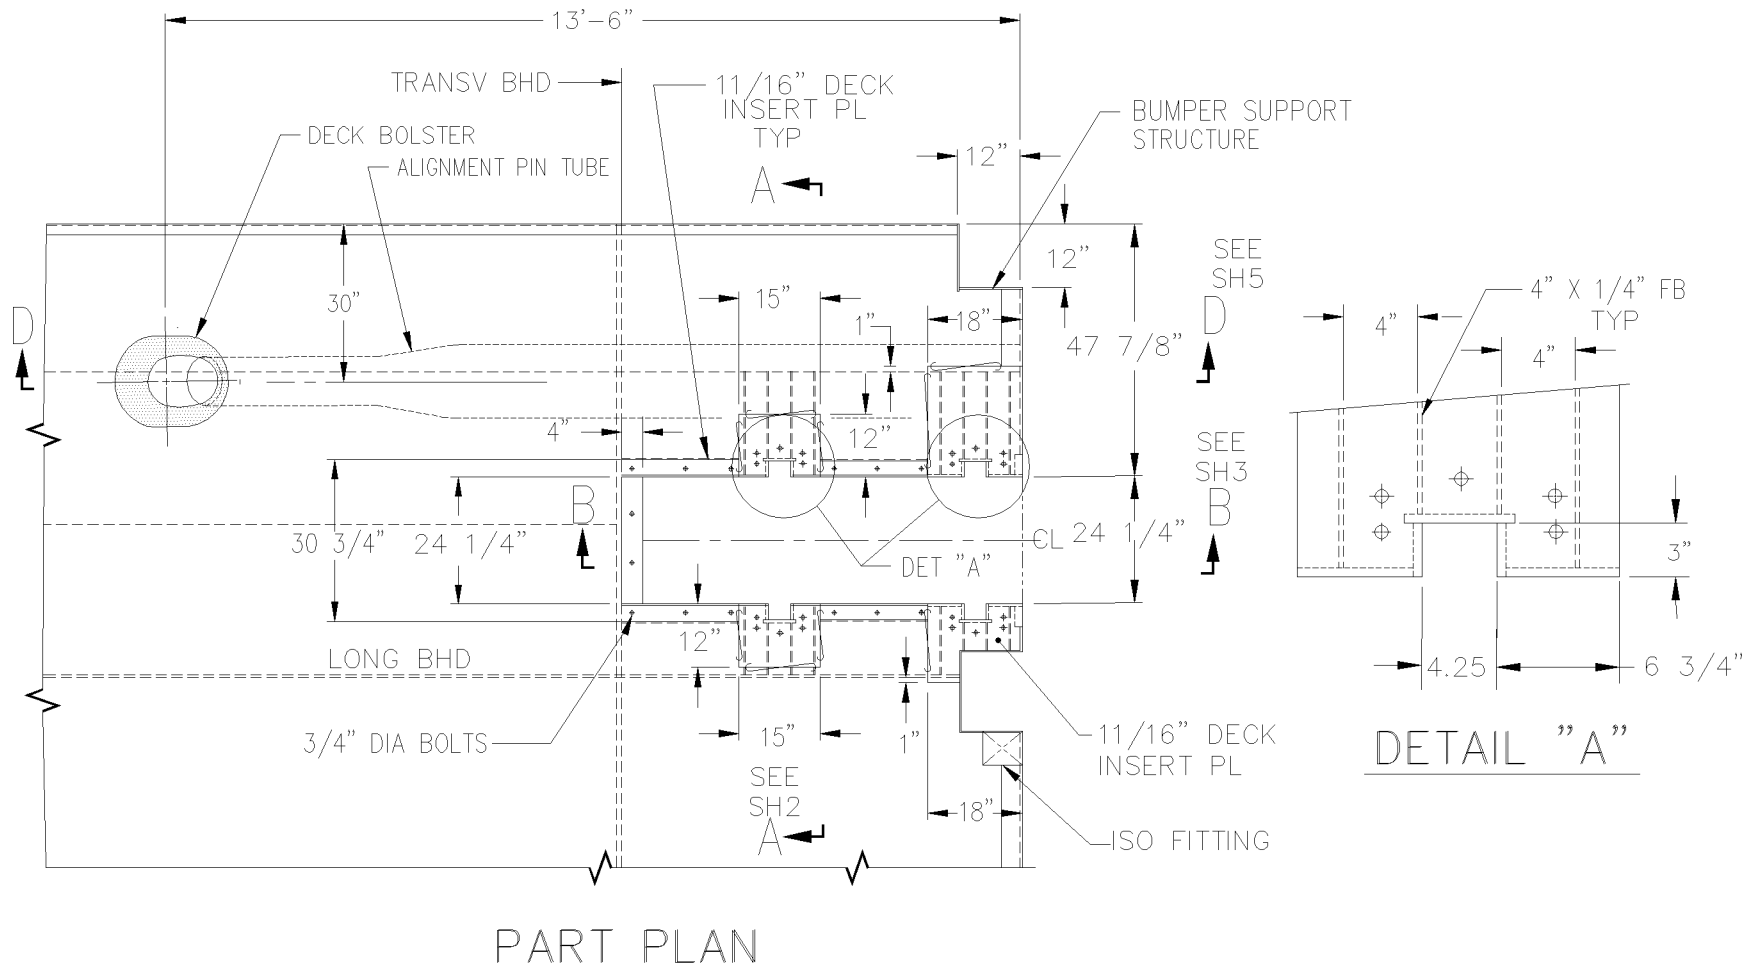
Typical Rigid Connector Recess (RCR) at ACB Module End (Sheet 1 of 5)
